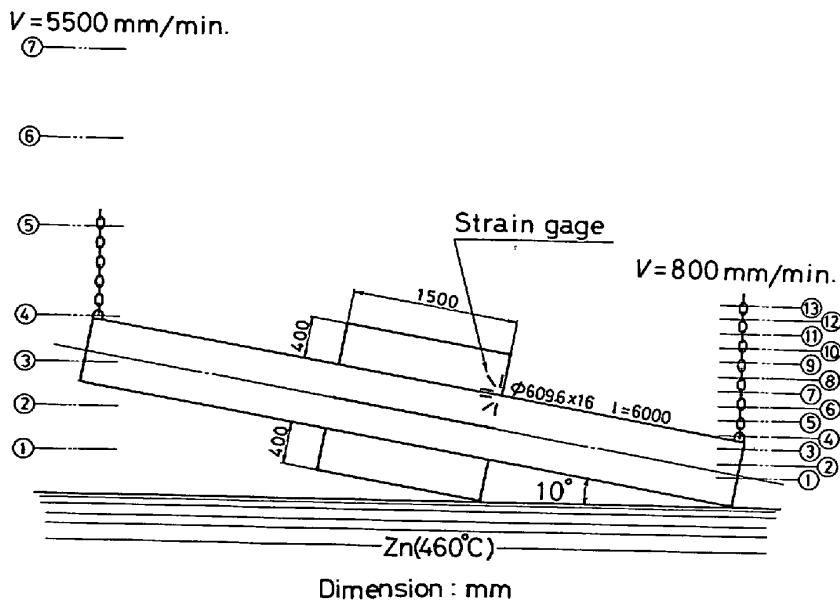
Schematic illustration of dipping of the steel pipe welded with steel plates into molten zinc.
